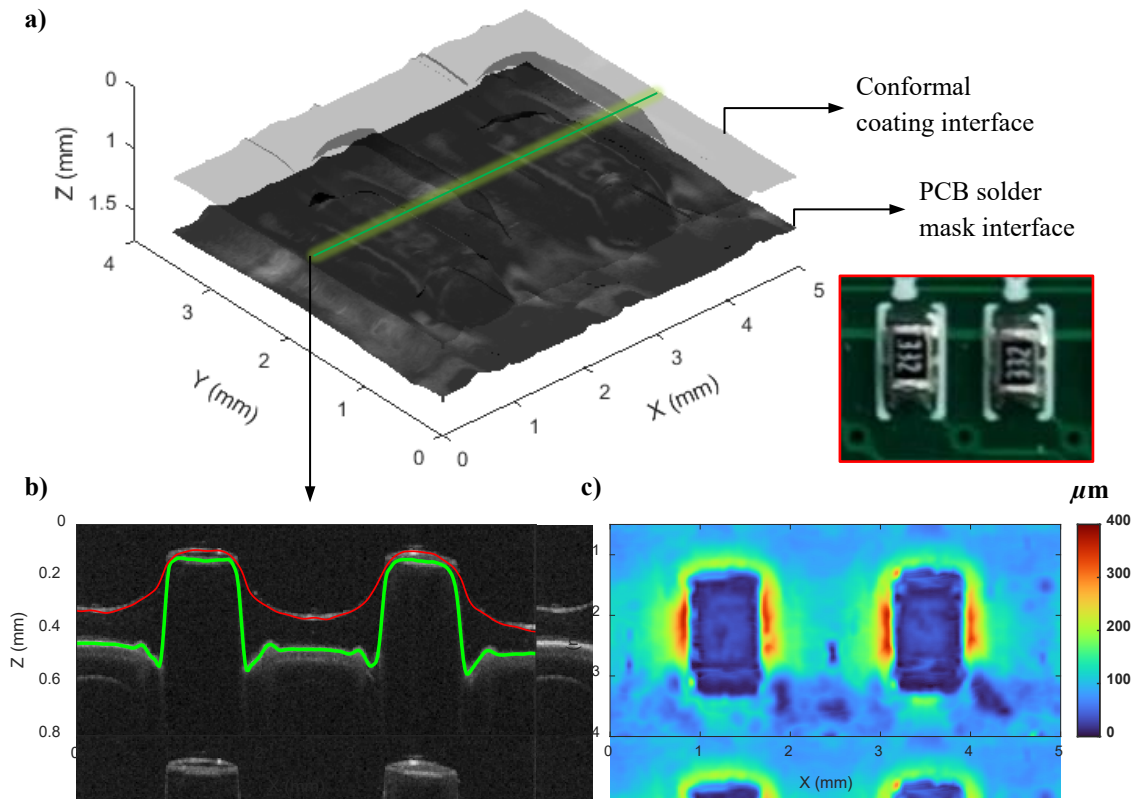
Measurement of printed circuit board (PCB) sample using the low-cost LF-FD-OCT system. (a) Volume rendering image of the PCB sample. The two interfaces are corresponding to air/the PCB's conformal coating and the conformal coating/the PCB's solder mask interfaces. (b) B-scan cross-sectional image in the x - z plane extracted from the position indicated by the green line in (a). The conformal coating layer is segmented and its upper and bottom boundaries are marked with red and green solid lines. (c) Thickness map of the conformal coating.
